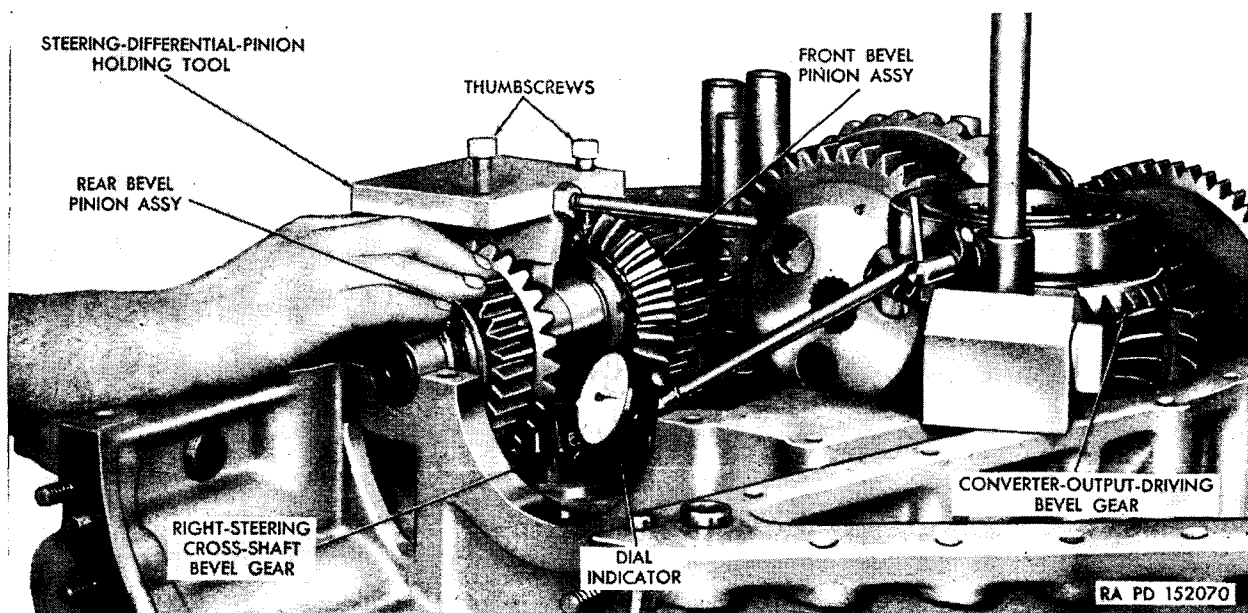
Steering-differential-bevel-pinion and gear backlash check.
